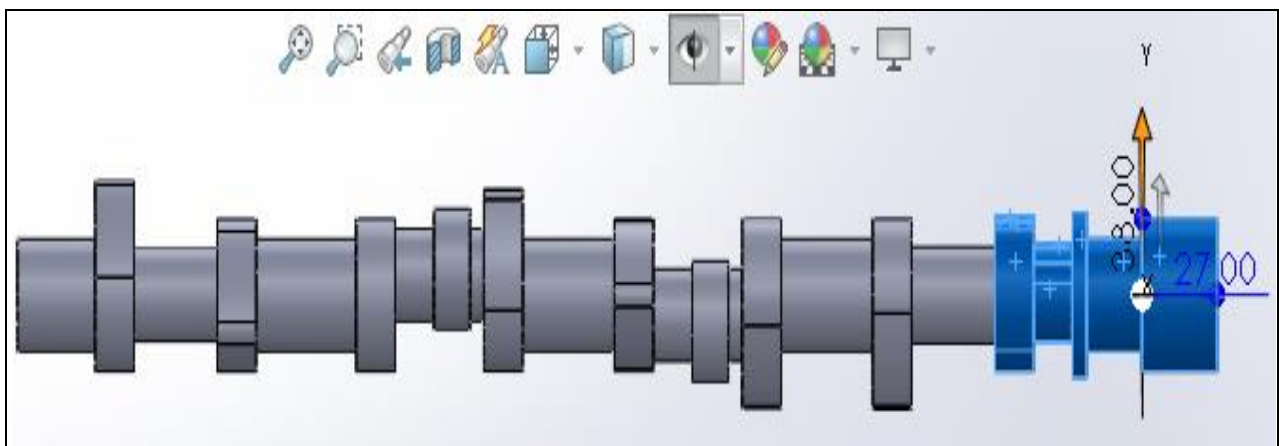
Step of construction a 3D shape of the seventh cam lobe and the Bearing Journals.
